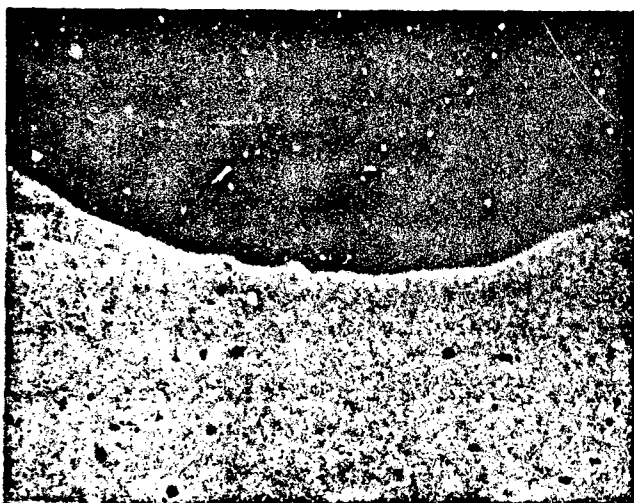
Electrical discharge machined holes in 1" laminated segments.
